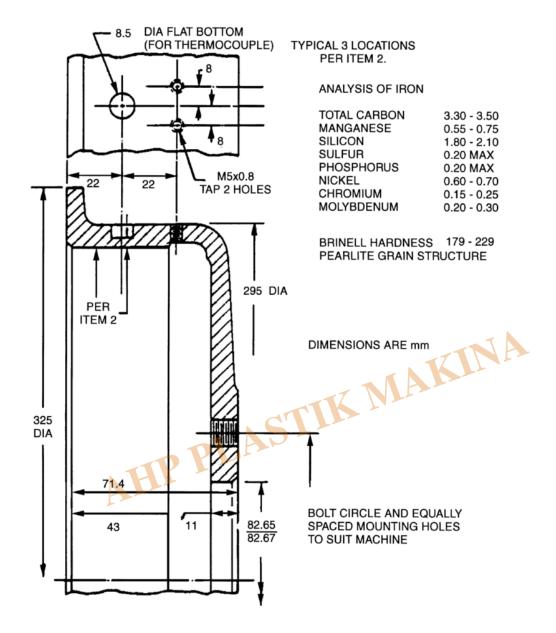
FRICTION MATERIALS TEST MACHINE DRUM
